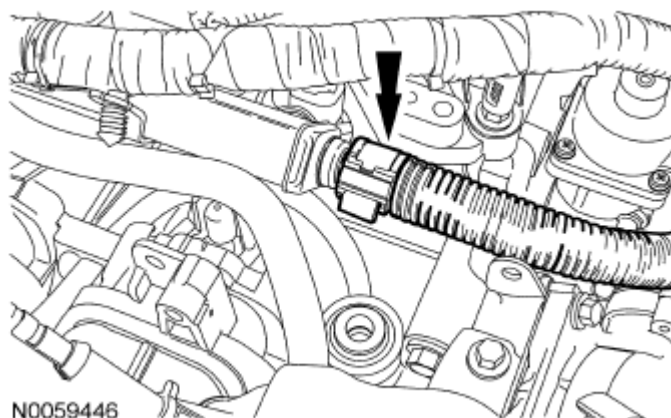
Locating Fuel Supply Tube Quick Connect Coupling
